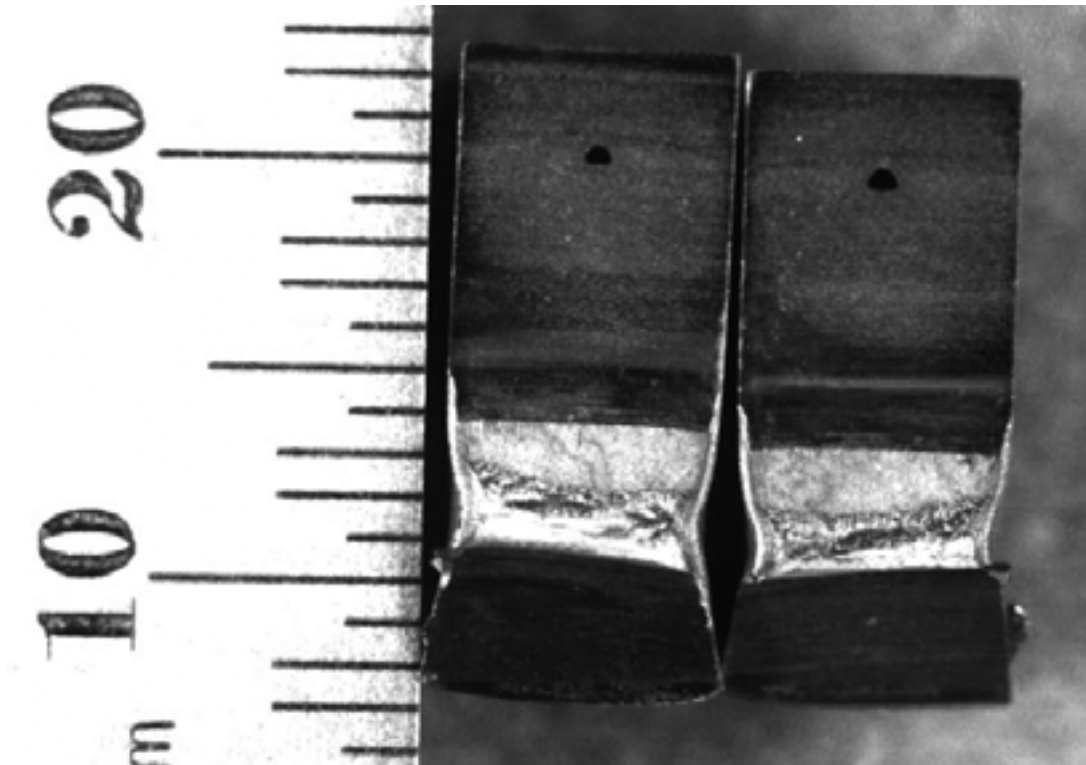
Fracture surface of specimen C19-D tested at 288°C
